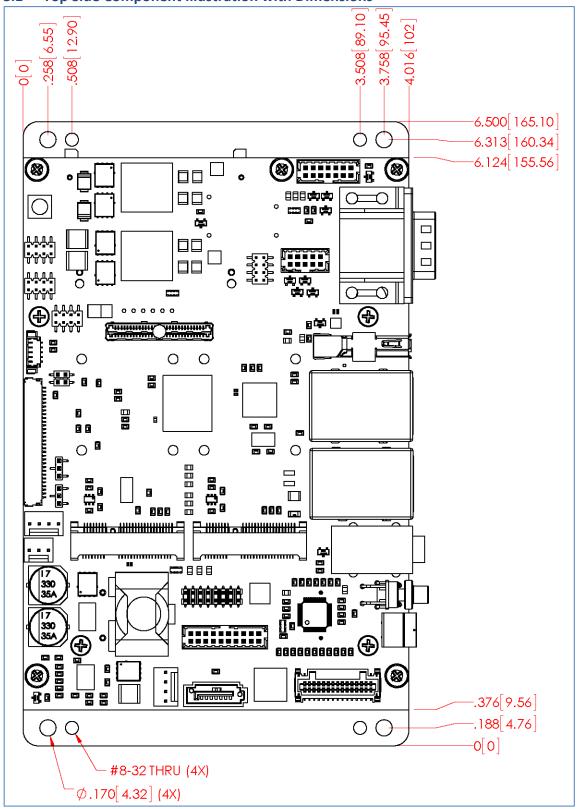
Top Side Component Illustration with Dimensions.
